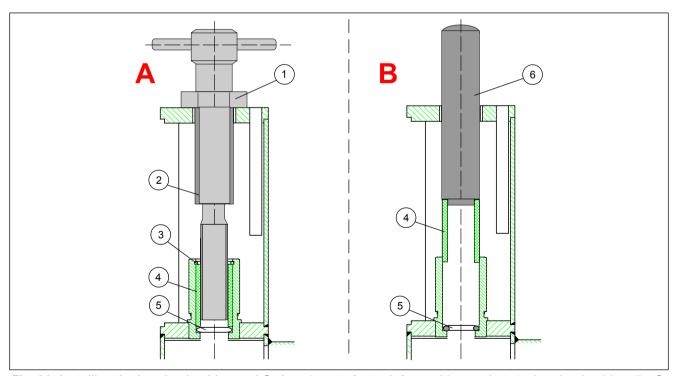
Installing the bearing bushing and O-ring: 1 - nut, 2 - tool, 3 - packing socket, 4 - bearing bushing, 5 - O-ring, 6 - push bar.
